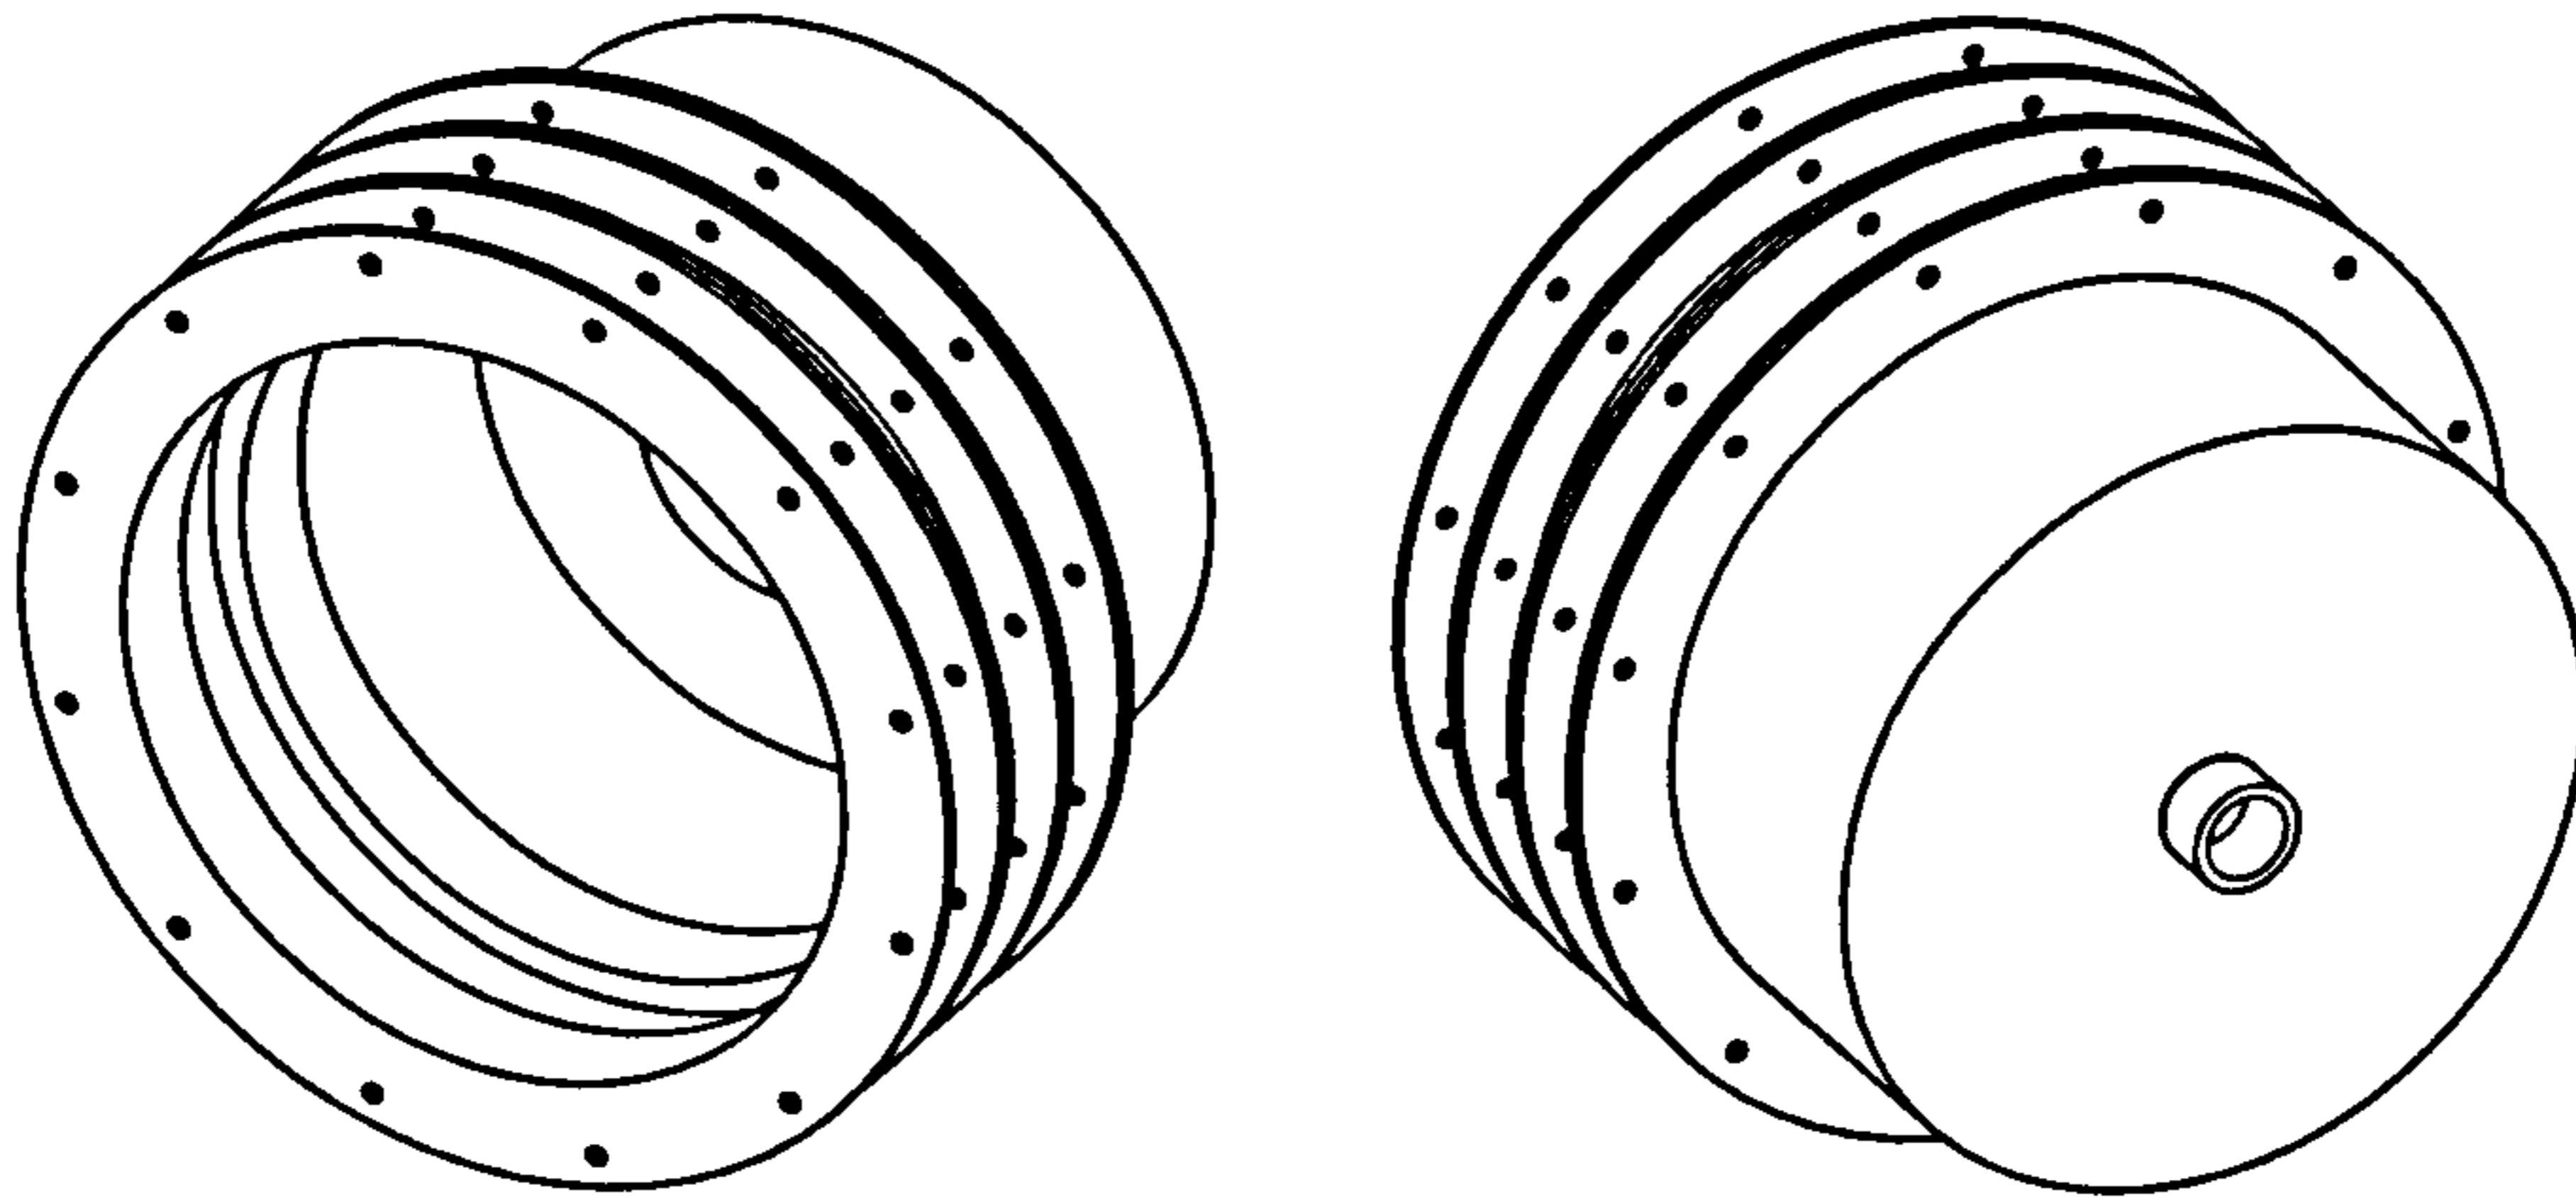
CAD model of the plenum chamber and deflector used in the investigation.
